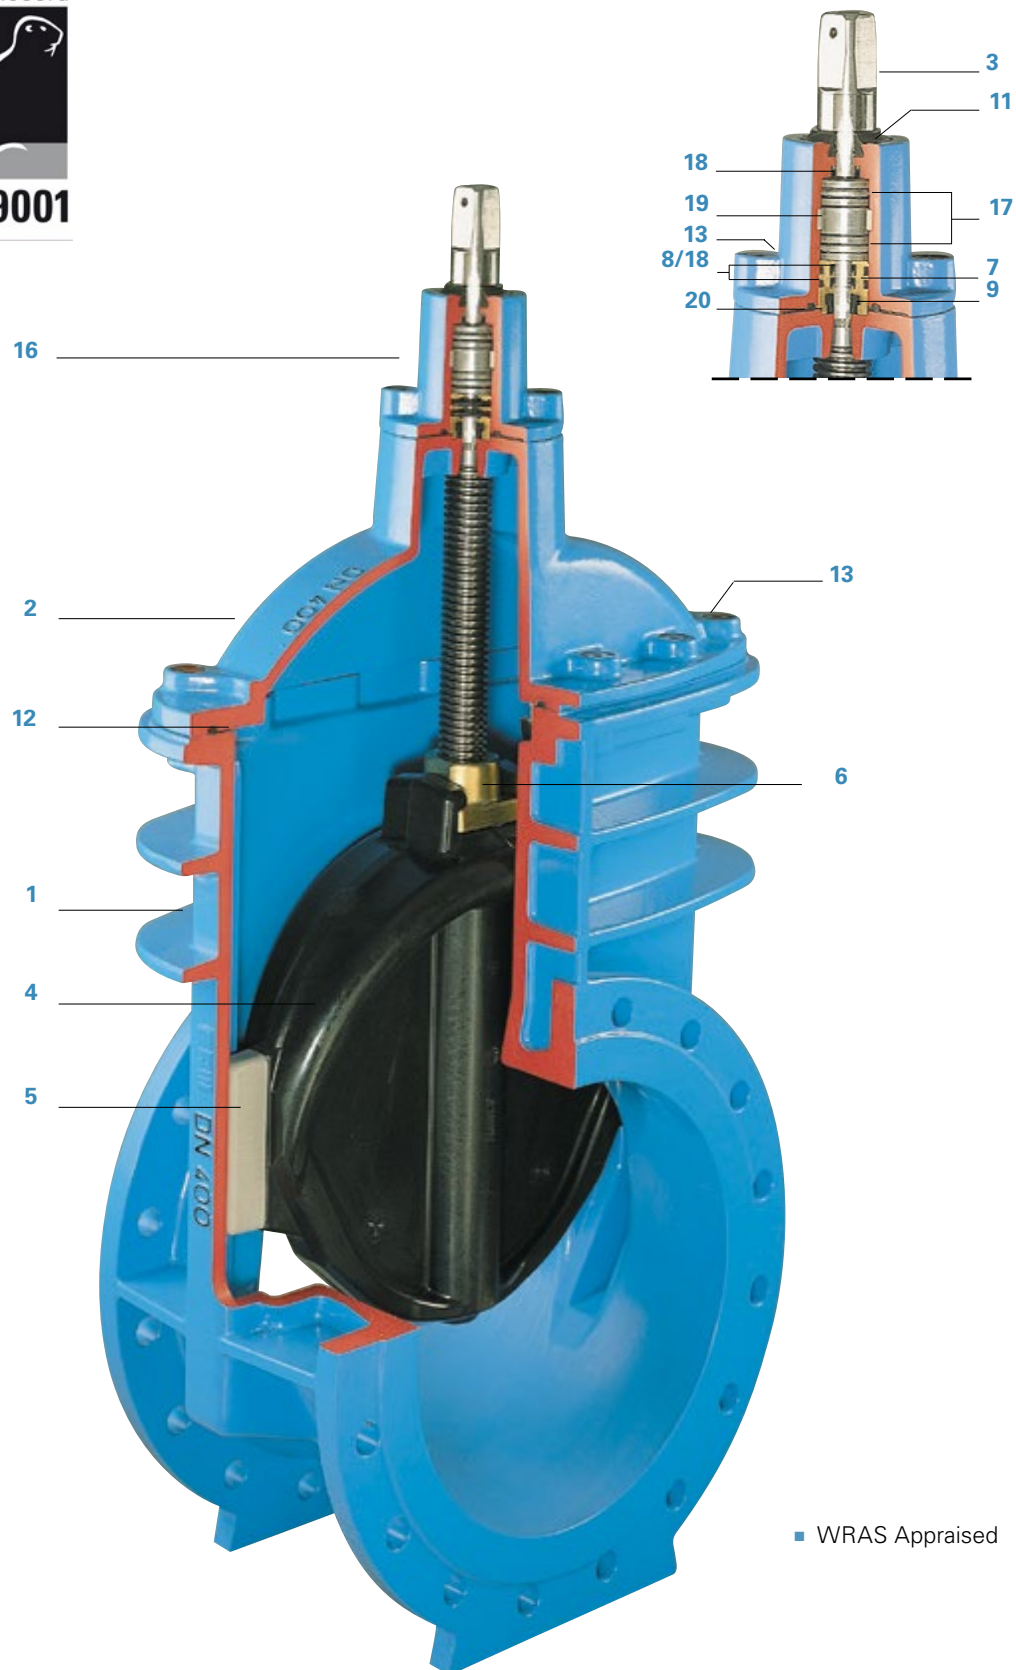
Hawle E3 Valve Flanged Ends DN350 – DN600
